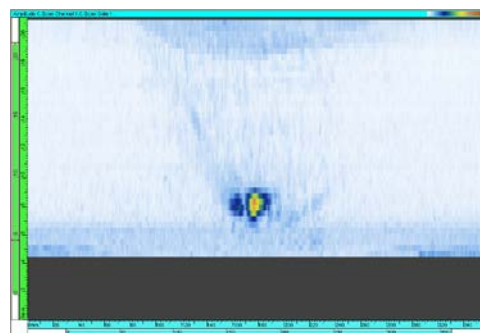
C-scan image of a weld interface, showing a weld defect at $\sim 180^\circ$ and nominally 7-9 mm from the outer edge of the shaft.
